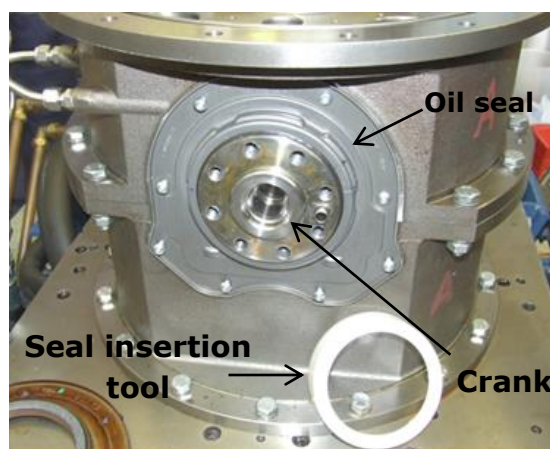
Crank shaft–casting gap sealed with oil seal.
